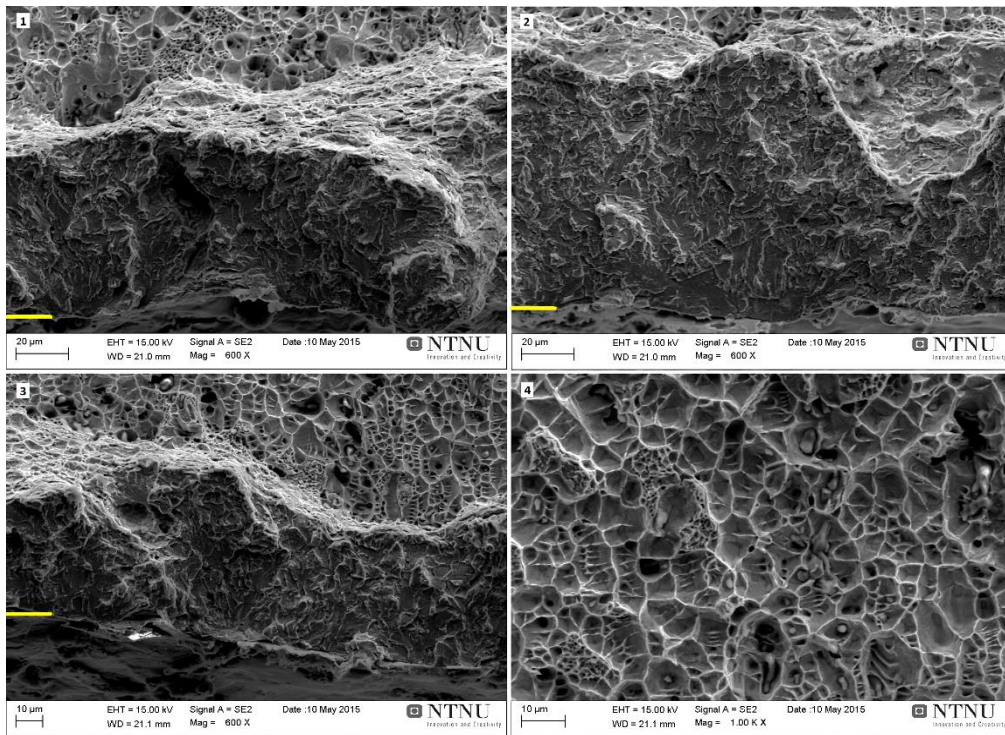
Sample A, test 5, clad section of specimen. The fracture surface is above the yellow line. The areas 1-4 are indicated in Figure 78 above.
